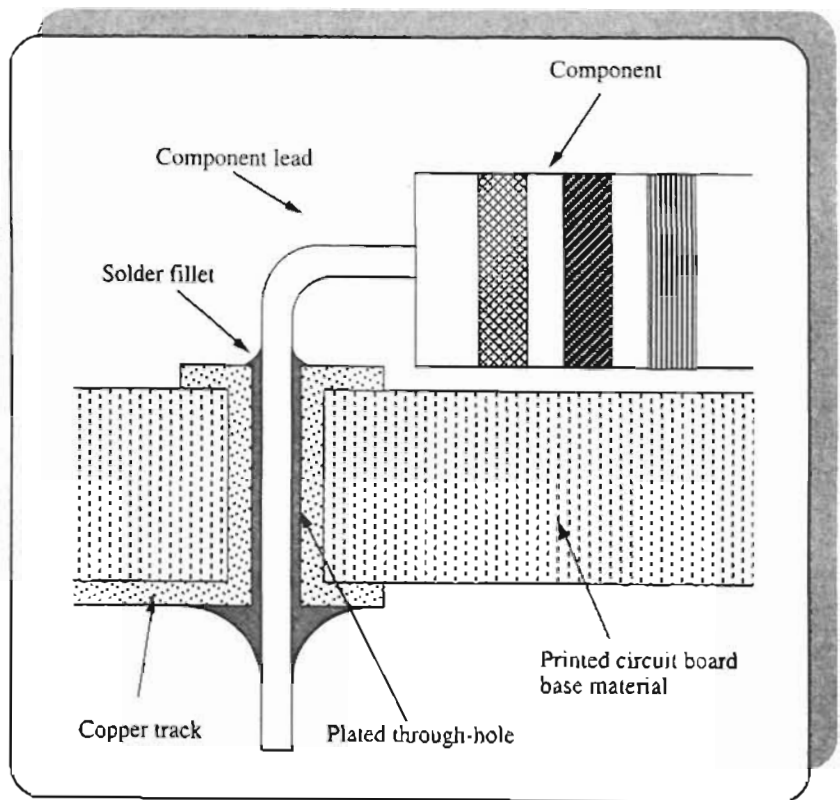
Plated through-hole, straight lead printed circuit board joint
